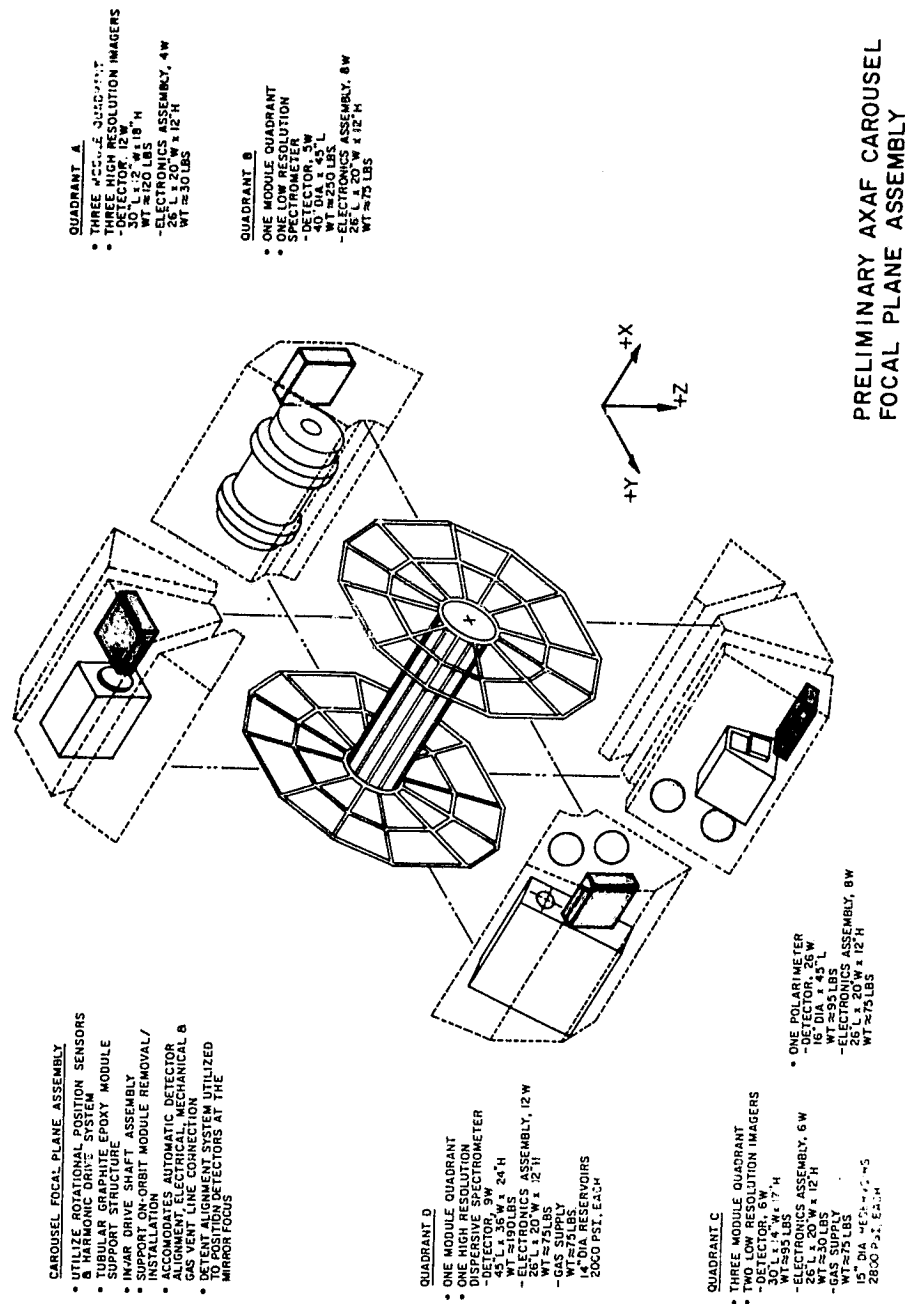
A modularized AXAF carousel focal plane assembly utilizing the strawman instrument and instrument module sizes.
